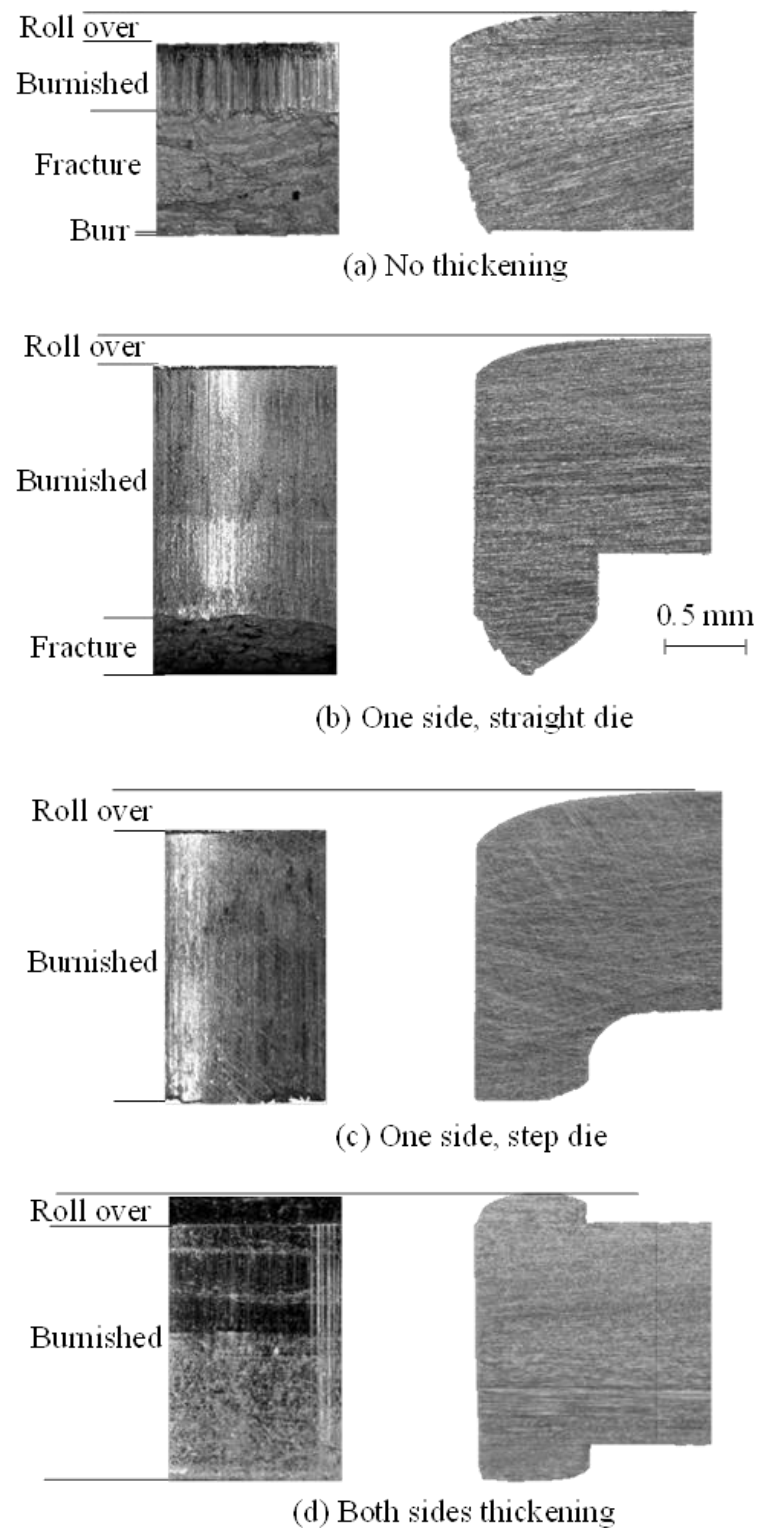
Surface and cross-section of sheared edge with and without thickening for $R = 6$ mm and JSC590.
